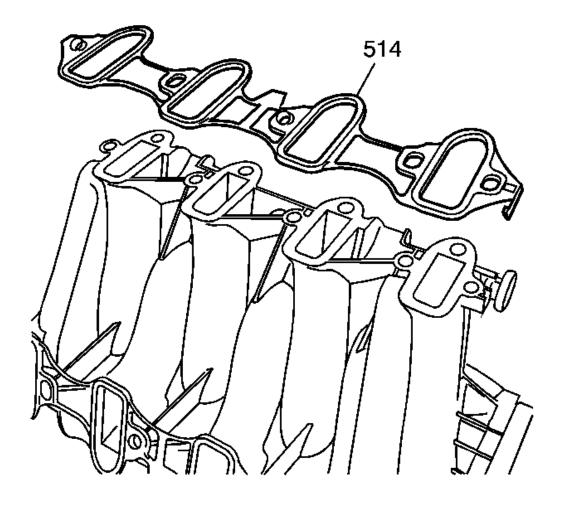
View Of Intake Manifold-To-Cylinder Head Gasket Courtesy of GENERAL MOTORS CORP.
